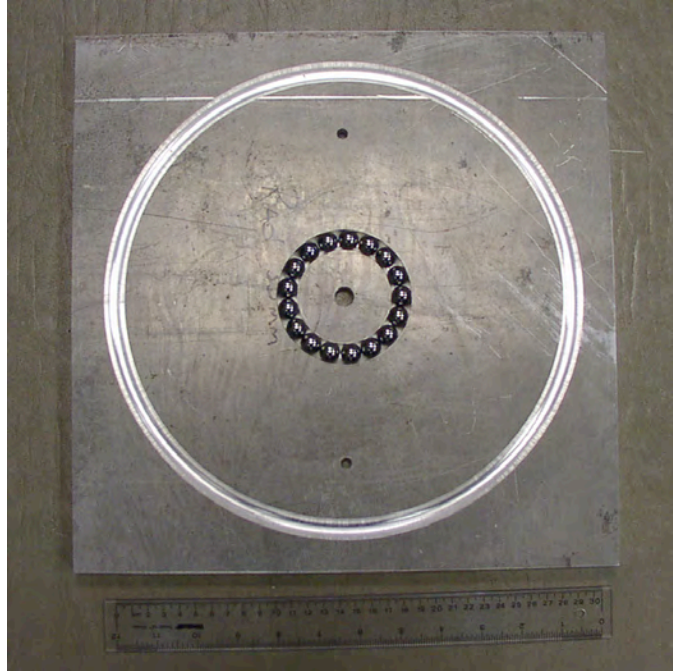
Nominal 70-mm (actually 69.2 mm) diameter ring fixture used for RoR biaxial flexure strength testing. 12.7-mm diameter balls comprise the 70-mm ring.
